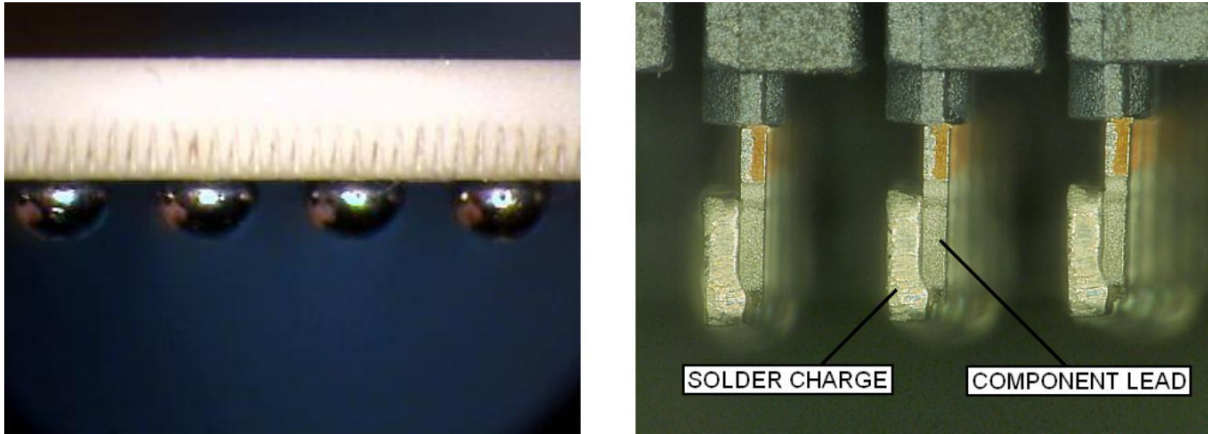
Solder Balls on BGA's v. Solder Charges on SEARAY™ Right Angle
